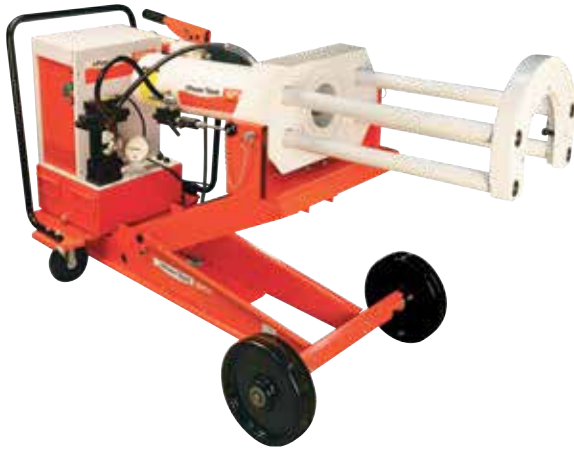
A self-contained portable machine equipped with a pump for installing and removing bearings.
